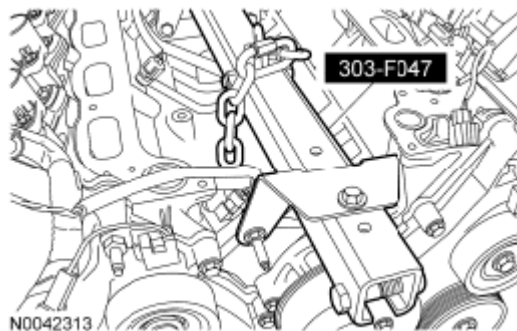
Identifying Engine Lift Bracket (303-F047)
